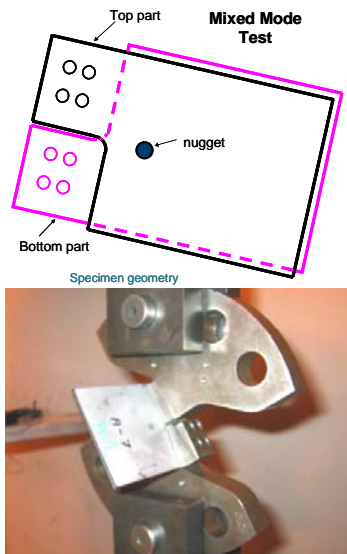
Mixed torsion/tension load weld coupon design and the experimental setup for mixed torsion/tension loading at 30 degrees.
